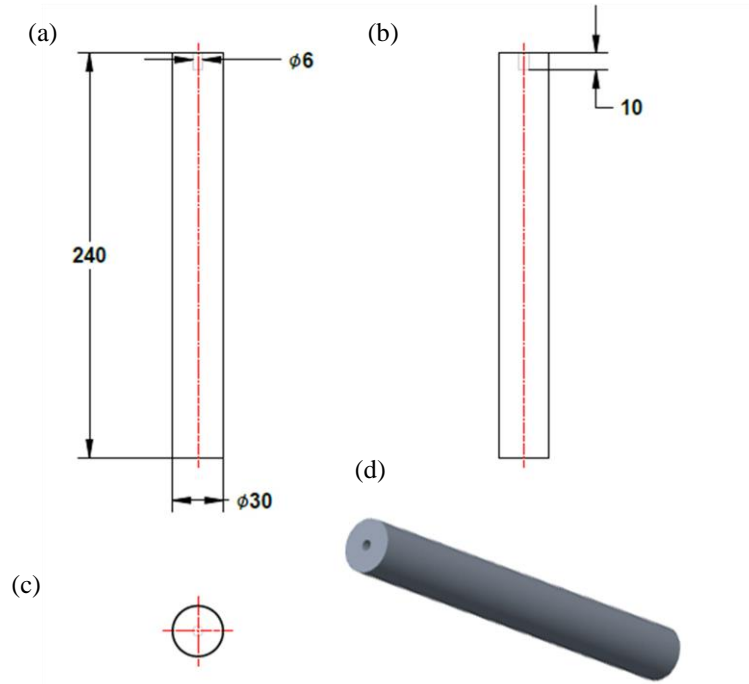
2D drawing of the (a) projected front view, (b) projected side view, (c) projected top view, and (d) three-dimensional CAD model of the guide rail for the height adjustment system (all dimensions in mm).
